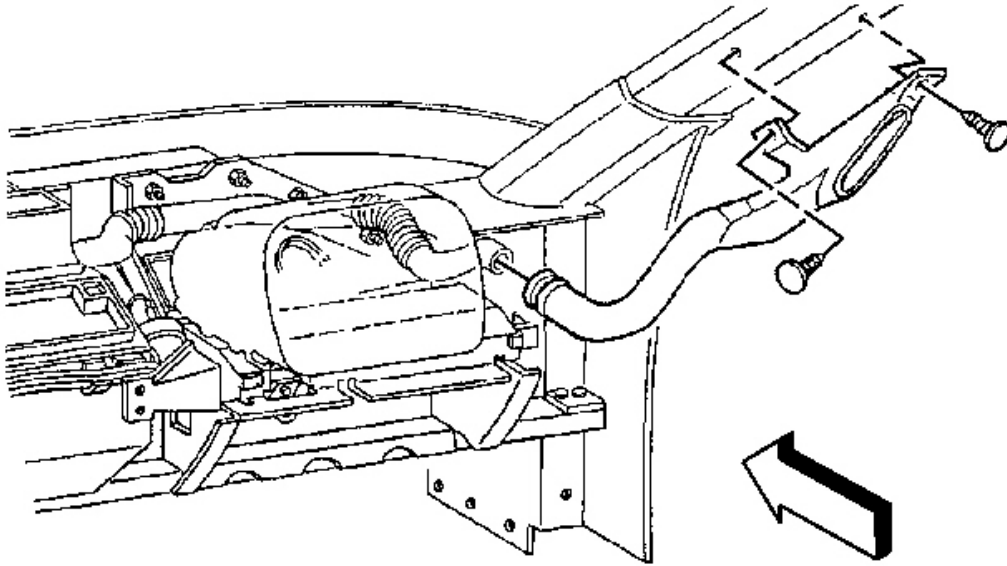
RH Side Window Defogger Upper Outlet Duct
